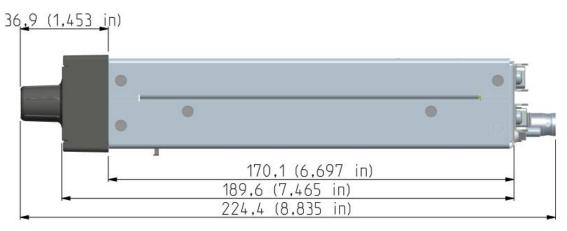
AR6203 side view, dimensions in mm and (inches)
